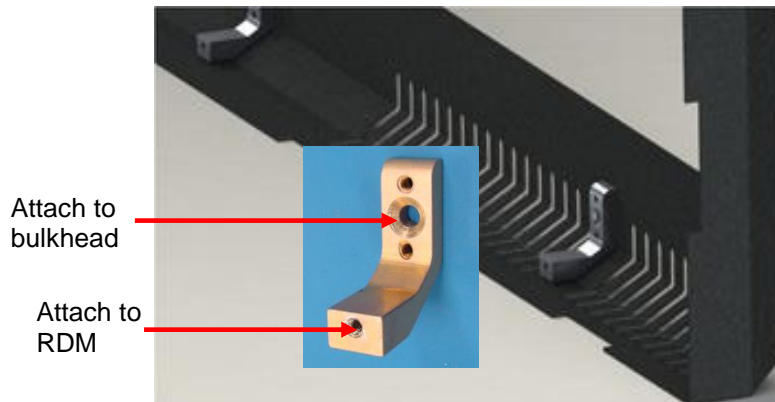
3201-800, 4201-800, and 5501-800 cosmetic back mounting bracket
